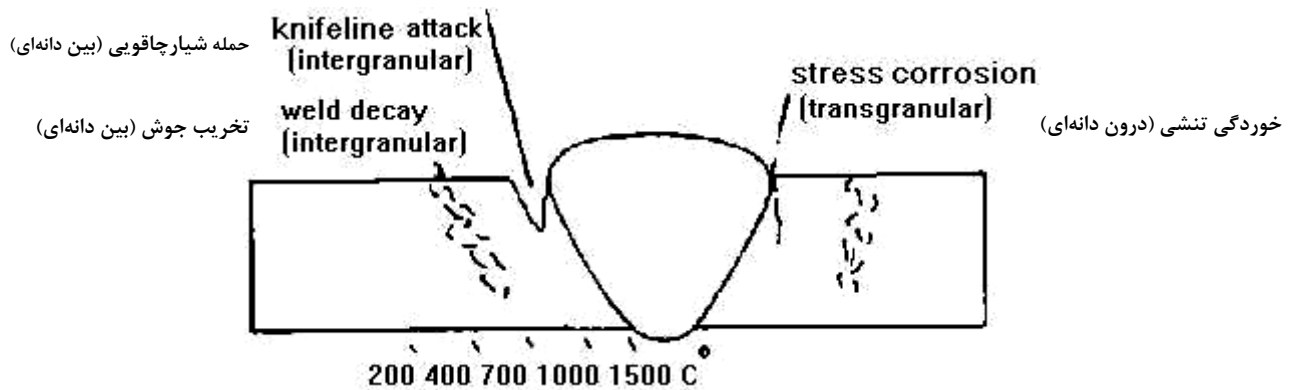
CORROSION SITES IN STAINLESS STEEL WELDS. THE TYPICAL PEAK TEMPERATURES ATTAINED DURING WELDING (°C) ARE GIVEN AT THE FOOT OF THE DIAGRAM.
